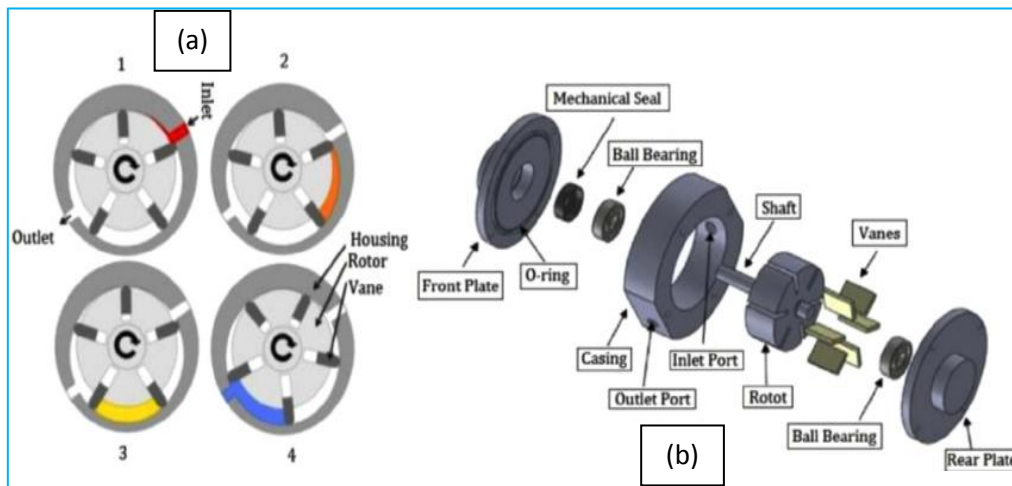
Schematic of rotary vane expander (a) operation steps, (b) parts details [102]
